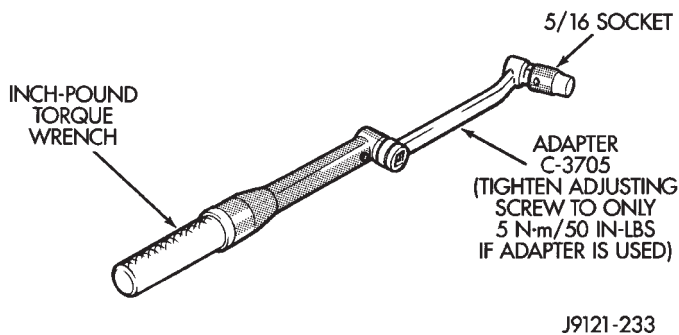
Using Band Adjustment Adapter Tool C-3705
